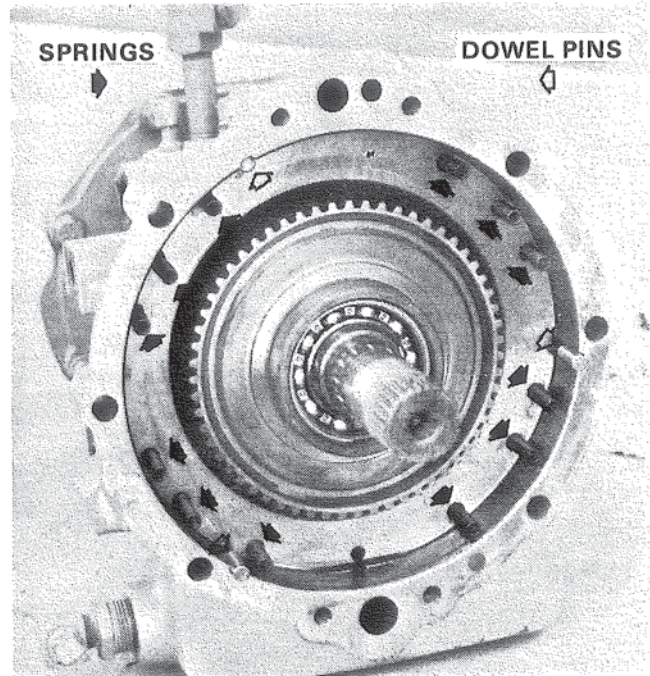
Removing Twelve (12) Pressure Plate Springs and Three (3) Dowel Pins.
